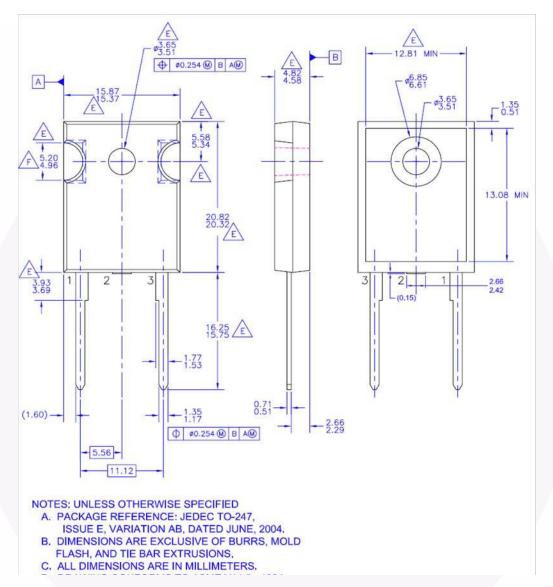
TO-247, Molded, 2LD, Jedec Option AB
